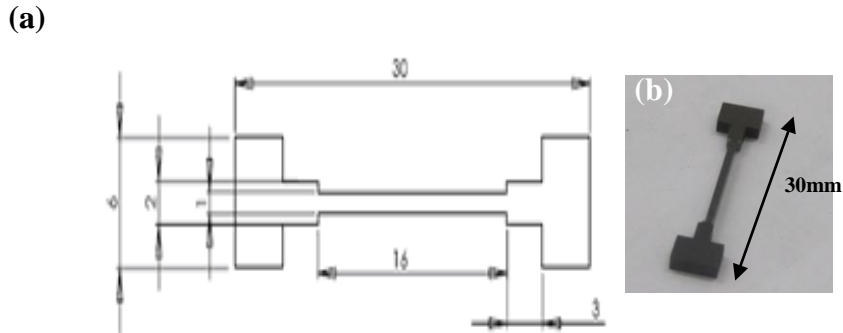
(a) schematic of the tensile sample cut from HIP1 sample, and (b) shape of tensile specimen
